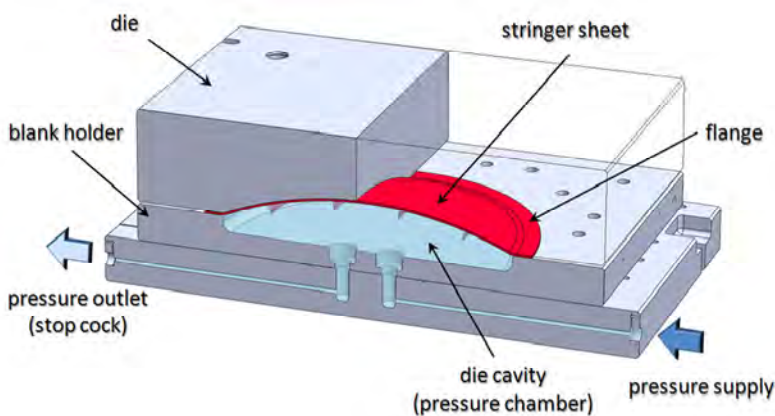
Sheet metal hydroforming of a stringer sheet (section view of a tool)
